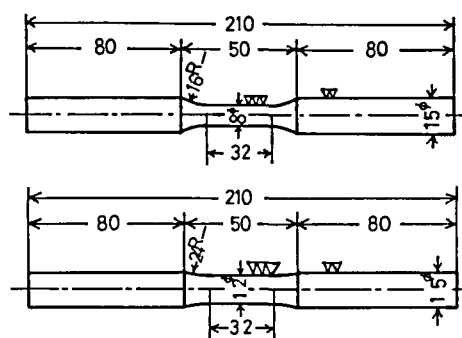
Shape and Dimensions of Fatigue Test Specimen.
